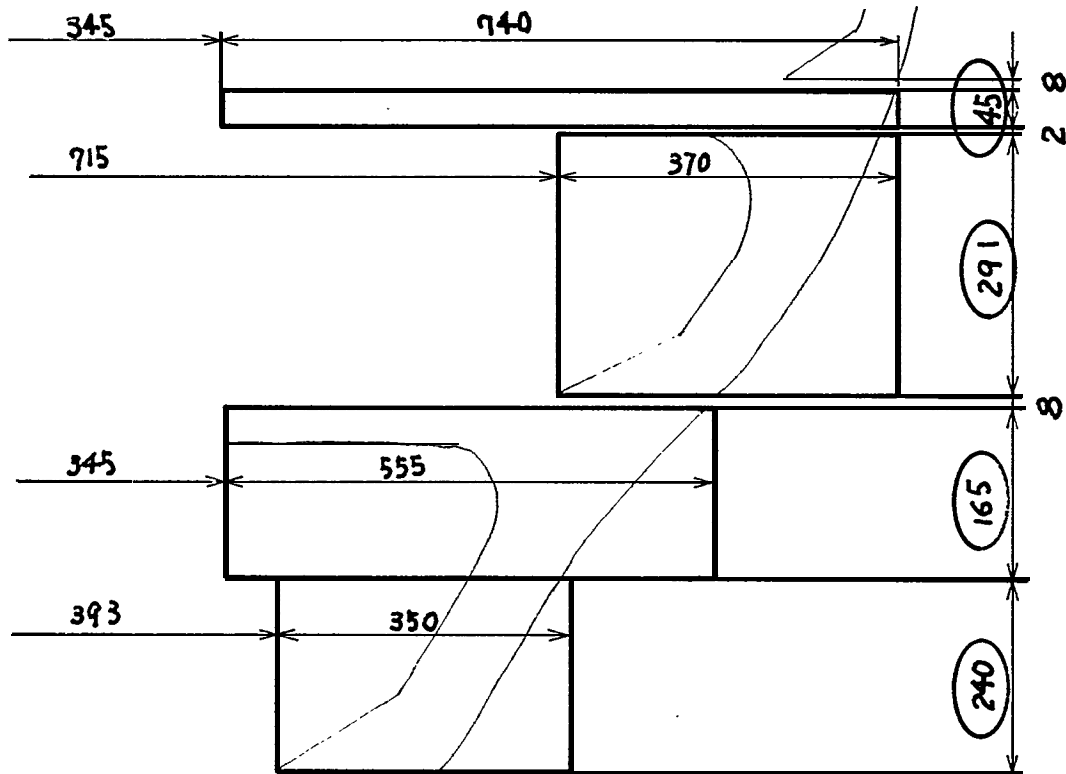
Cutting Plan. Note spaces allowed for decks.
